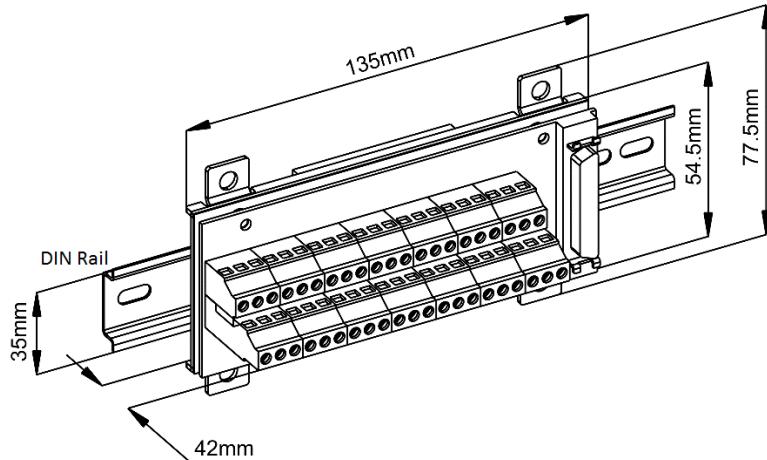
DIN-Rail Mounting of SCCT Adapter Board
